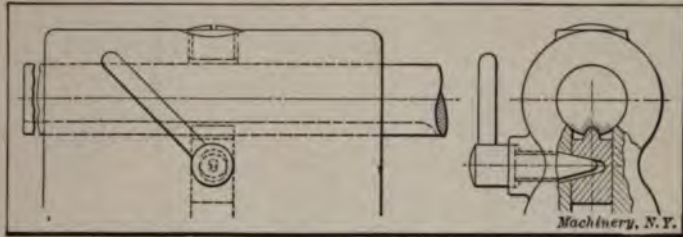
Wedge Action Clamp for Grinder Tailstock
